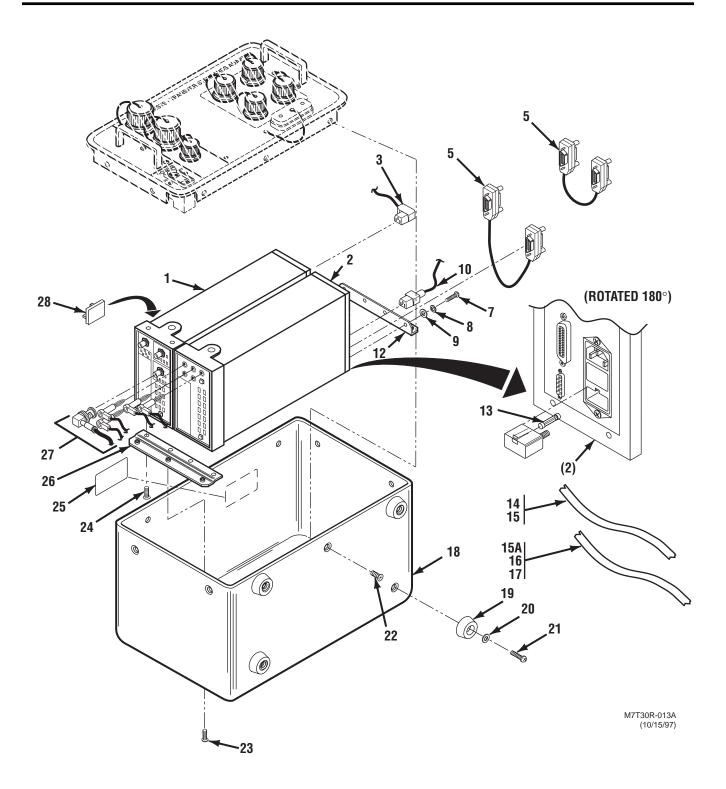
Group 96000302 Special Tools (Repair Parts) Transfer Standards Adapter Assembly 12972100 (Sheet 1 of 2)
